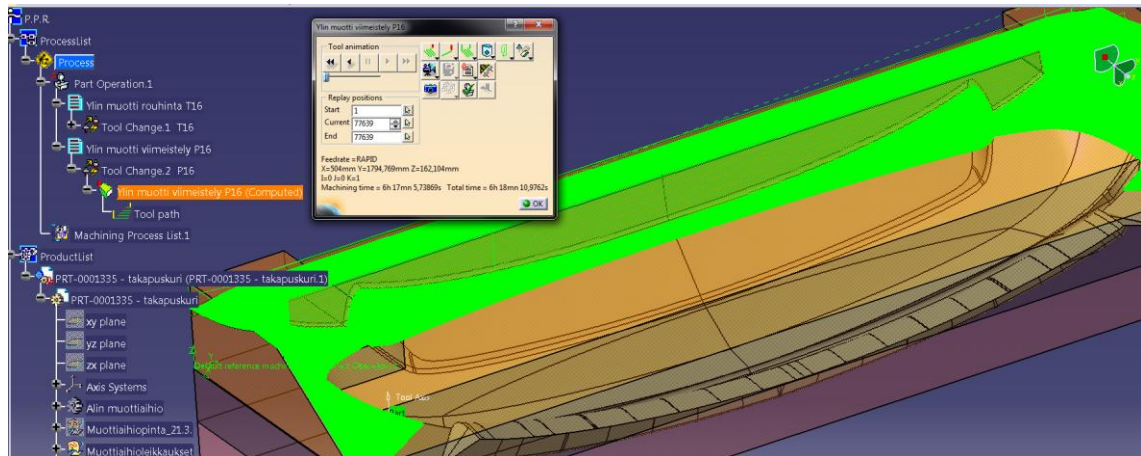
CATIA Surface Machining –tool, showing computed machining time and machining tool path (green lines)
